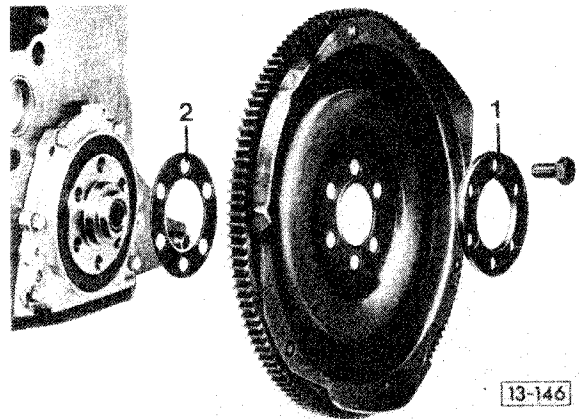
Drive plate assembly. Use only one shim 1. Combine shims 2 (1 mm and/or 4 mm) to achieve correct cylinder block clearance dimension.
